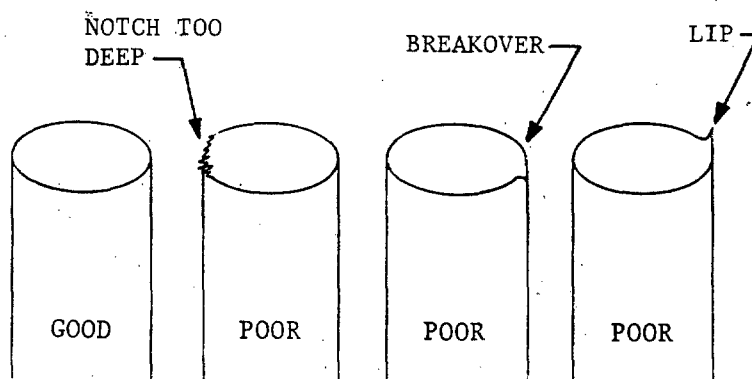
Plastic Clad Silica Fiber End Face Appearance.
